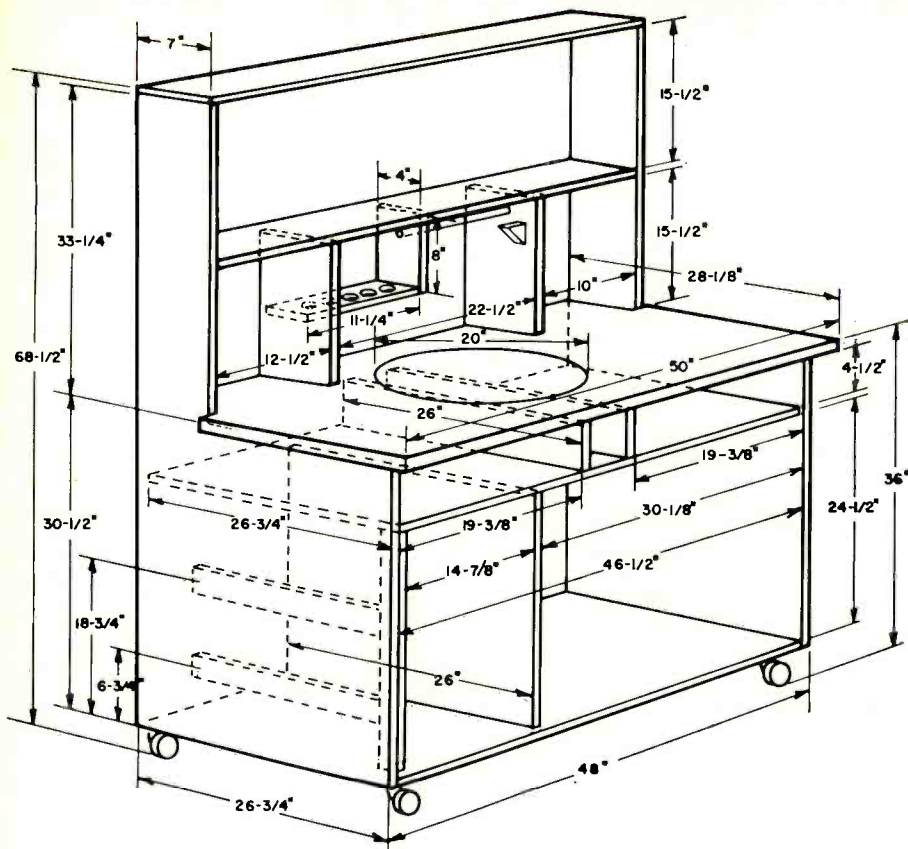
This assembly diagram should be followed for construction and major dimensions.
